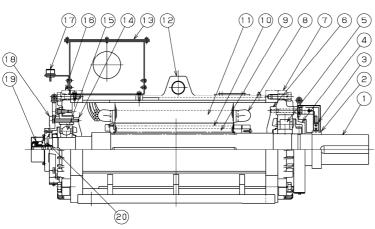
Structural sectioned drawing of EDM3551W to EDM43W
